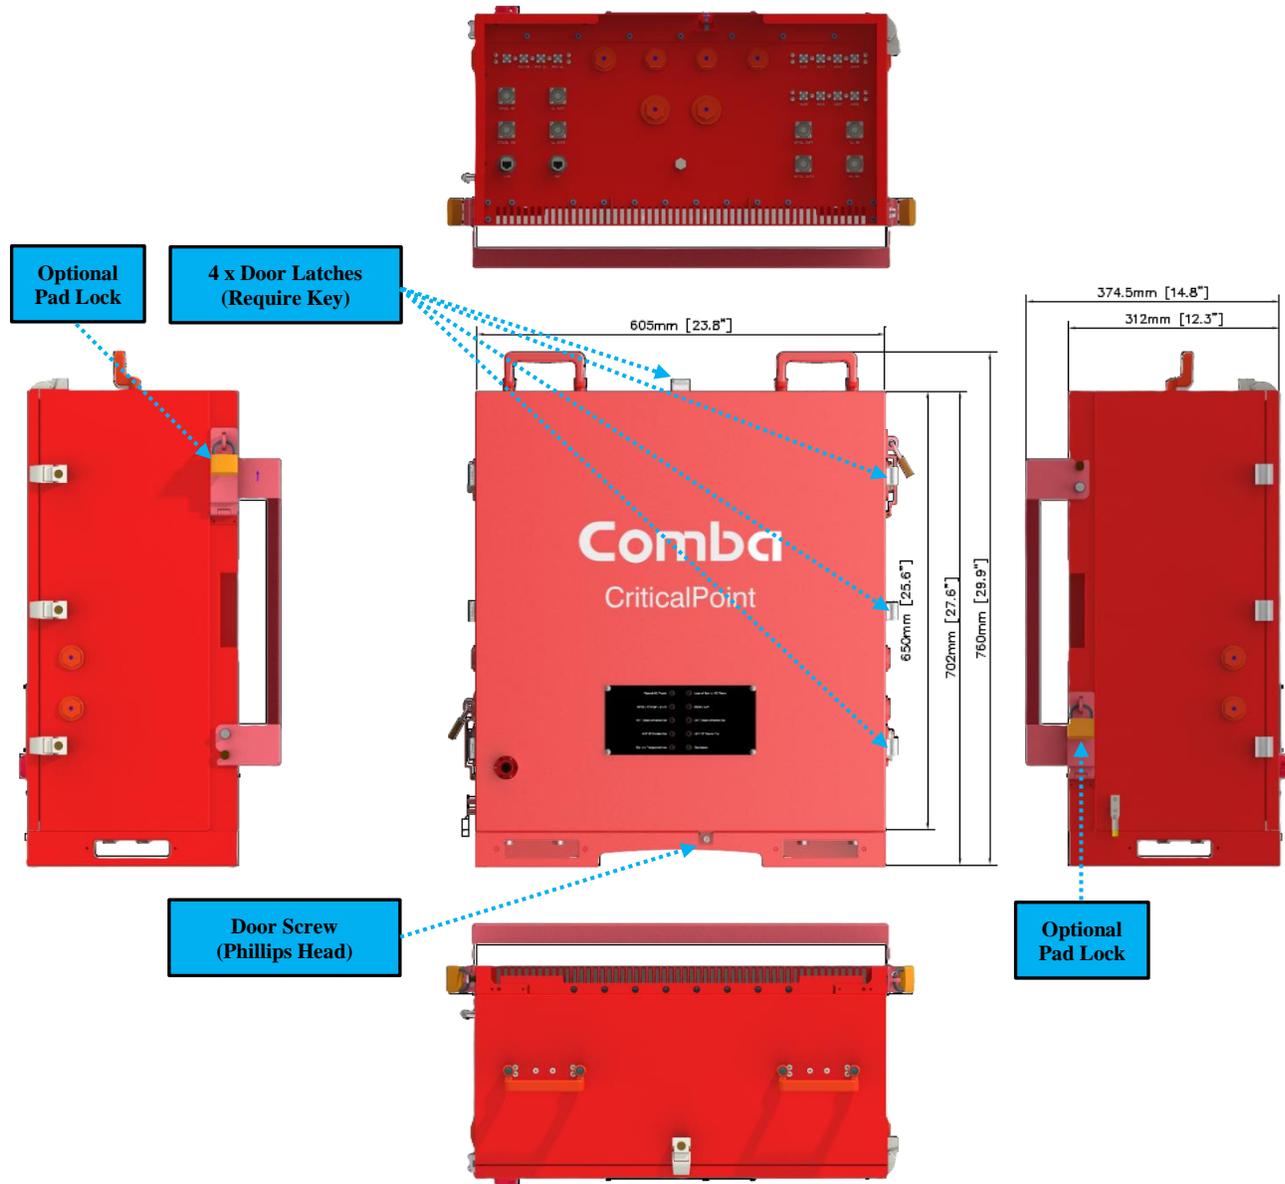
V3 BDA/MU Cabinet Dimensions – Front, Side, Top and Bottom View
